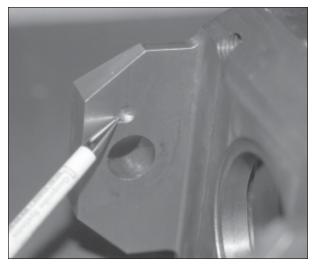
Position bottom plate so detent ball indenture is on left side of plate.
